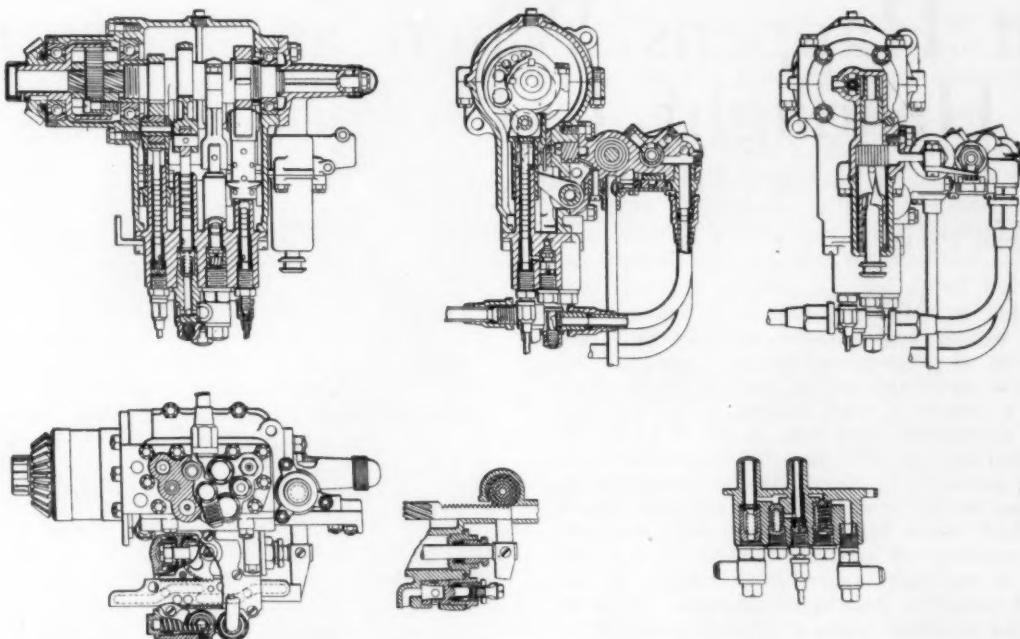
FUEL-PUMP ASSEMBLY IN TRANSVERSE AND LONGITUDINAL SECTIONS AND PLAN VIEW
